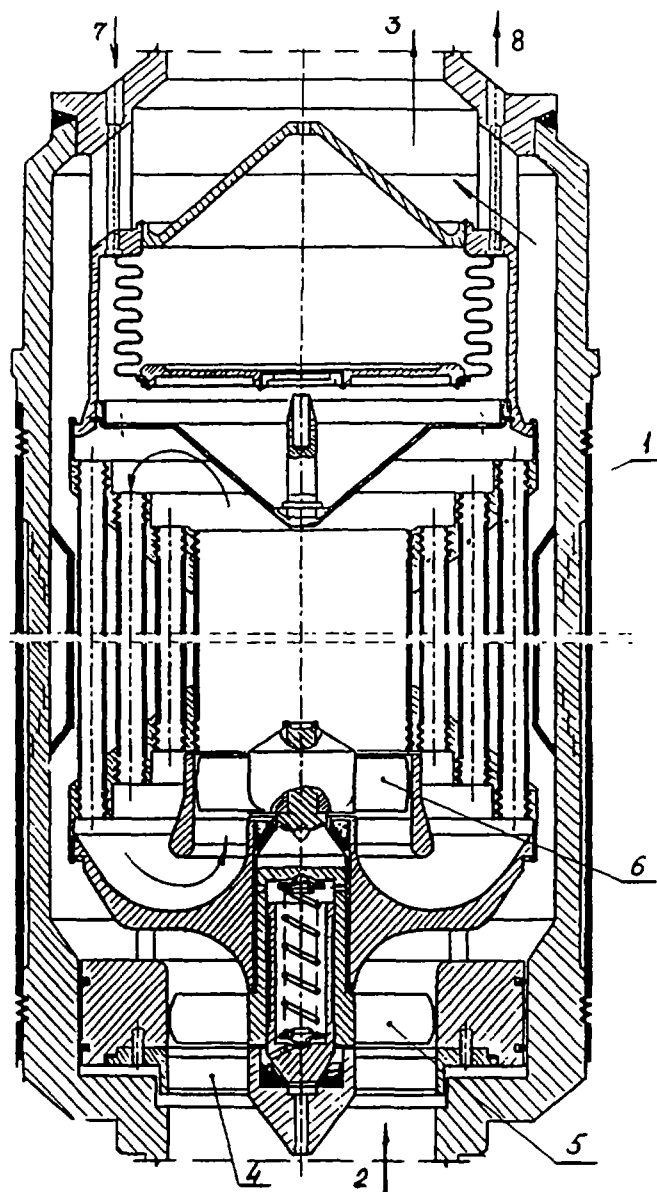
Vertical cross section of the fluid fuel element. 1 - fluid fuel circuit, 2 - coolant inlet, 3 - coolant outlet, 4 - flow guider, 5 - turbo-drive, 6 - pump, 7 - feed inlet, 8 - fuel regeneration outlet
